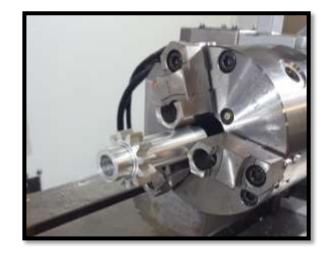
Test Mid Shaft After Cutting Gear Tooth Profiles
